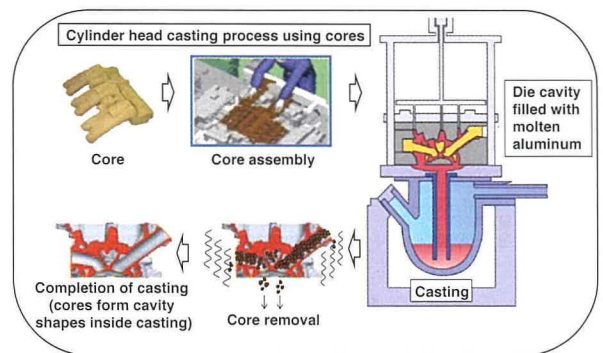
Aluminum Casting Process and Cylinder Head Manufacturing Method
